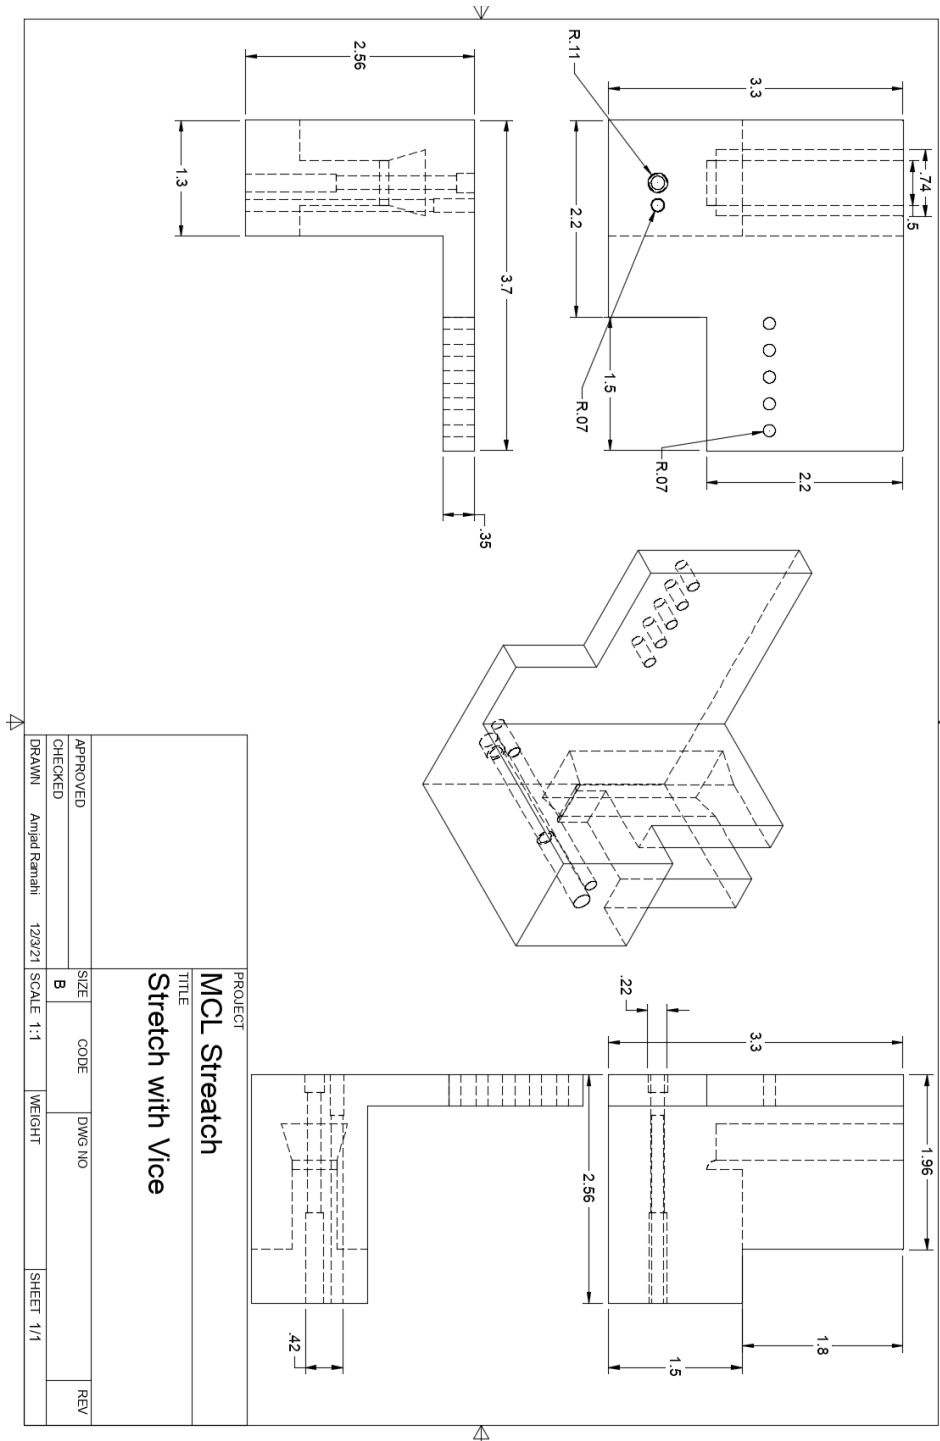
Drawing of MCL Stretch Device Vice Component 3. The drawing shows dimensioned of the vice component 3 used in the MCL stretch device.
